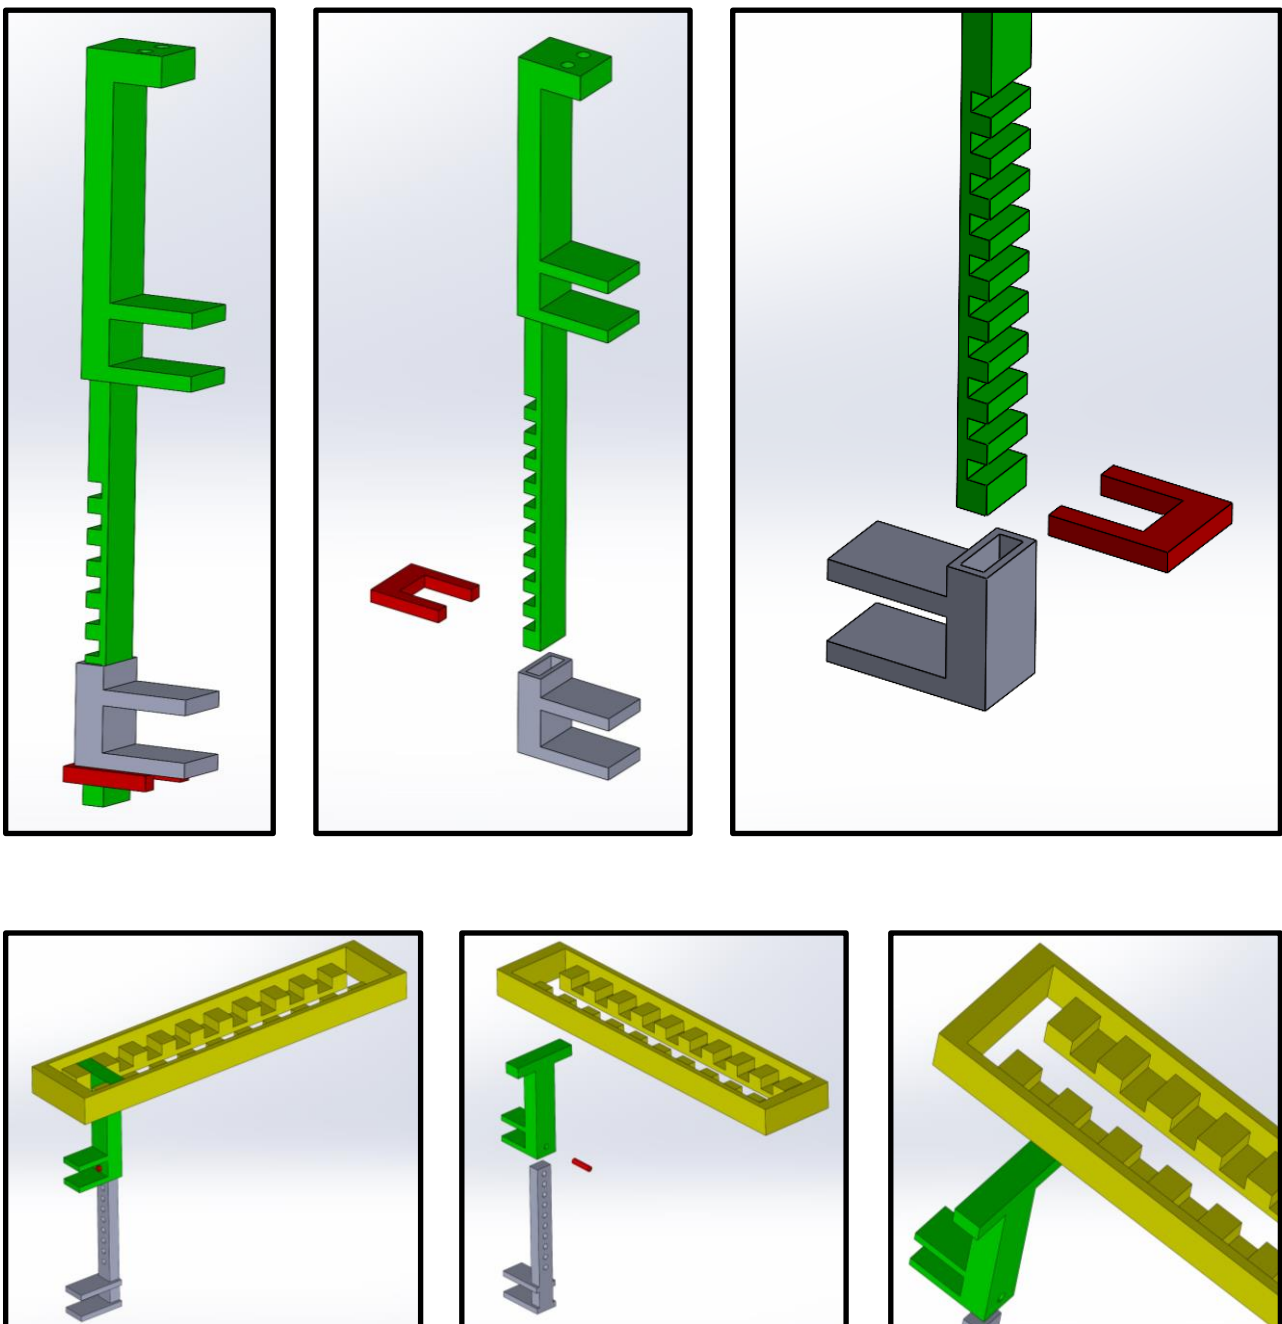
Global views (left), exploded views (middle) and details (right) of the fixed grip (top row) and the mobile grip (bottom row).
